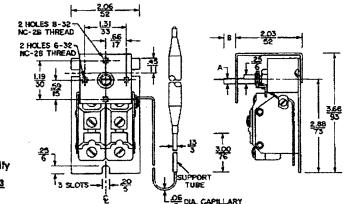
Center support, front mounting. Bracket optional at extra cost.
